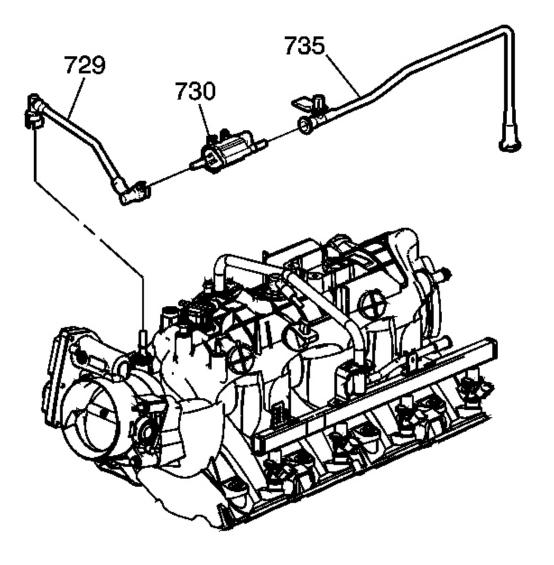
EVAP Purge Valve & Tubes Courtesy of GENERAL MOTORS CORP.
